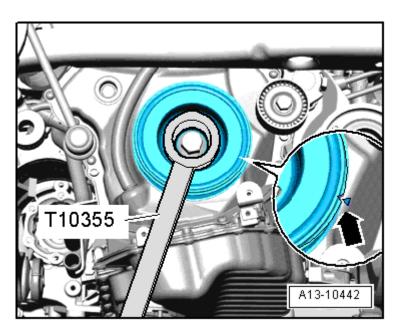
Identifying Vibration Damper Rotated Into "OT" Position Using Counter Hold Tool T10355
